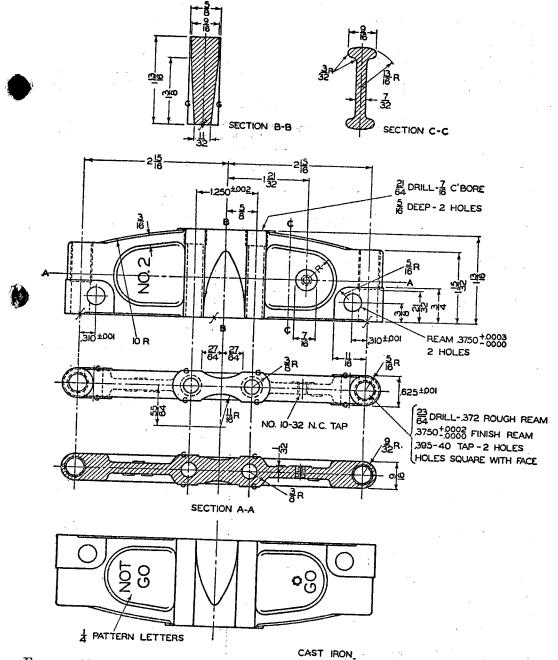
Adjustable length gage, detail of length gage head, double-sided model No. 2.
